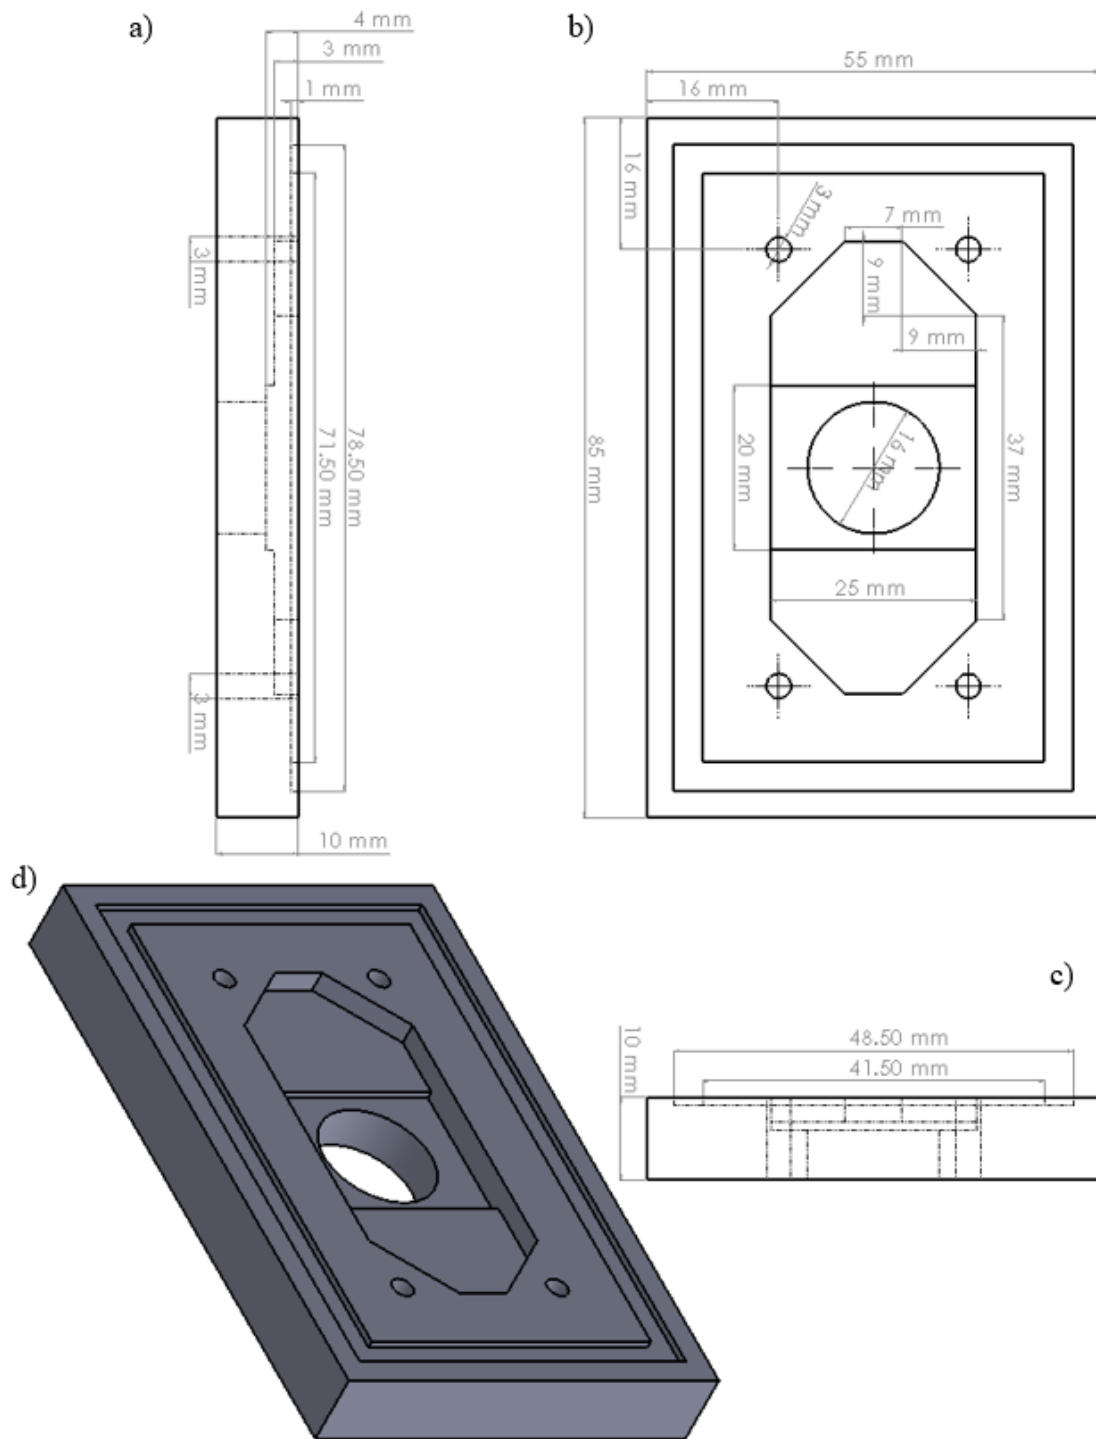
3D design of sample holder with the size of 2 cm x 2.5 cm a) Left view, b) Top view, c) Front view, d) 3D view.
